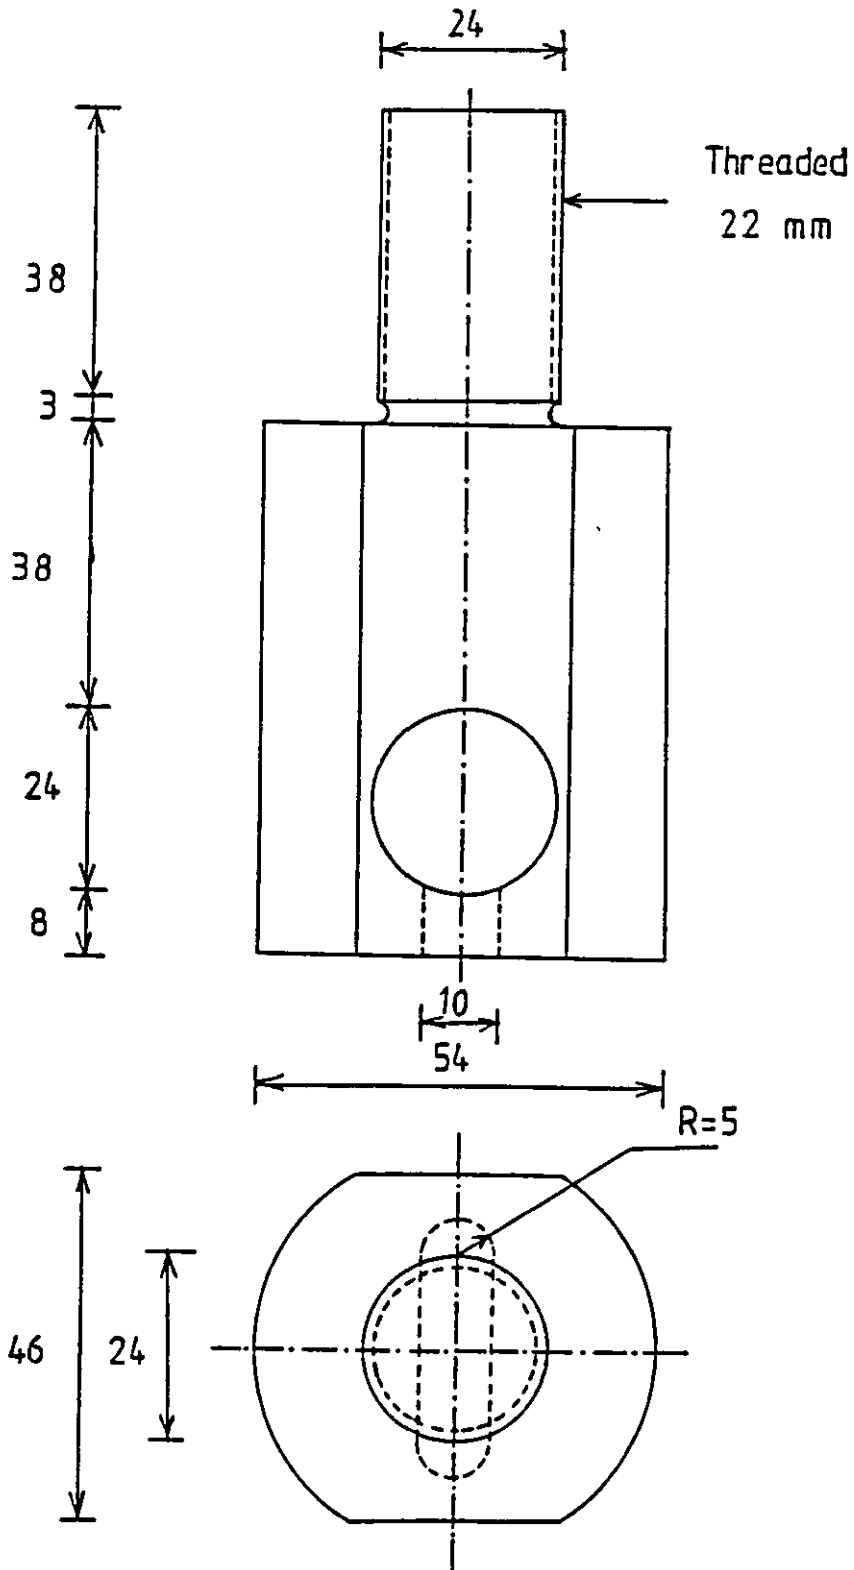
Detail drawing of the grips (all dimensions in mm).
